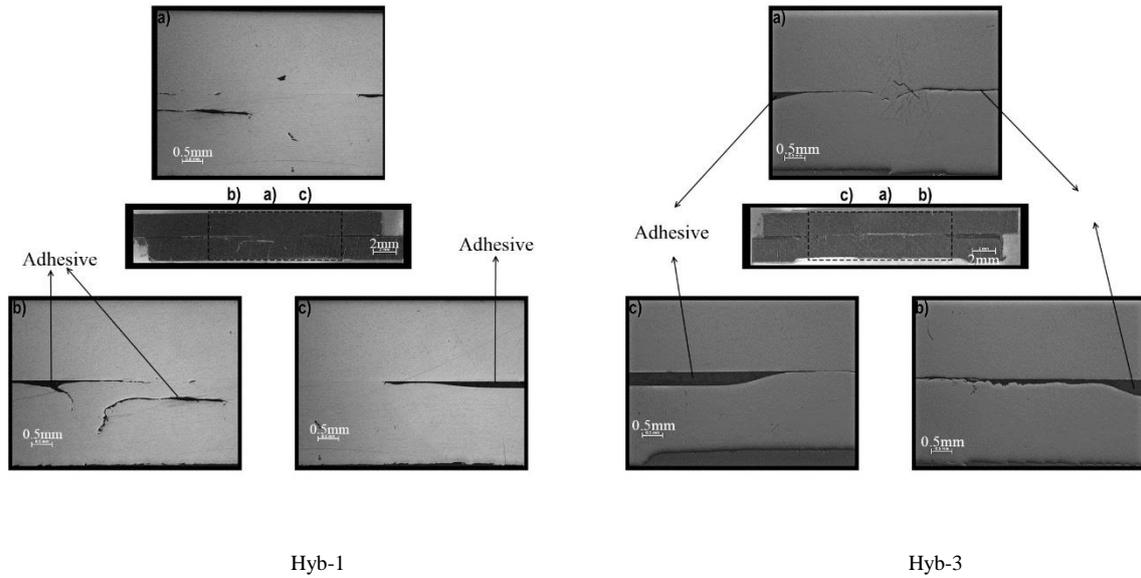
Macroscopic and microscopic figures of the Hyb-1 and Hyb-3 weld cross sections; a) center of the weld, b) retreating side and c) advancing side.
